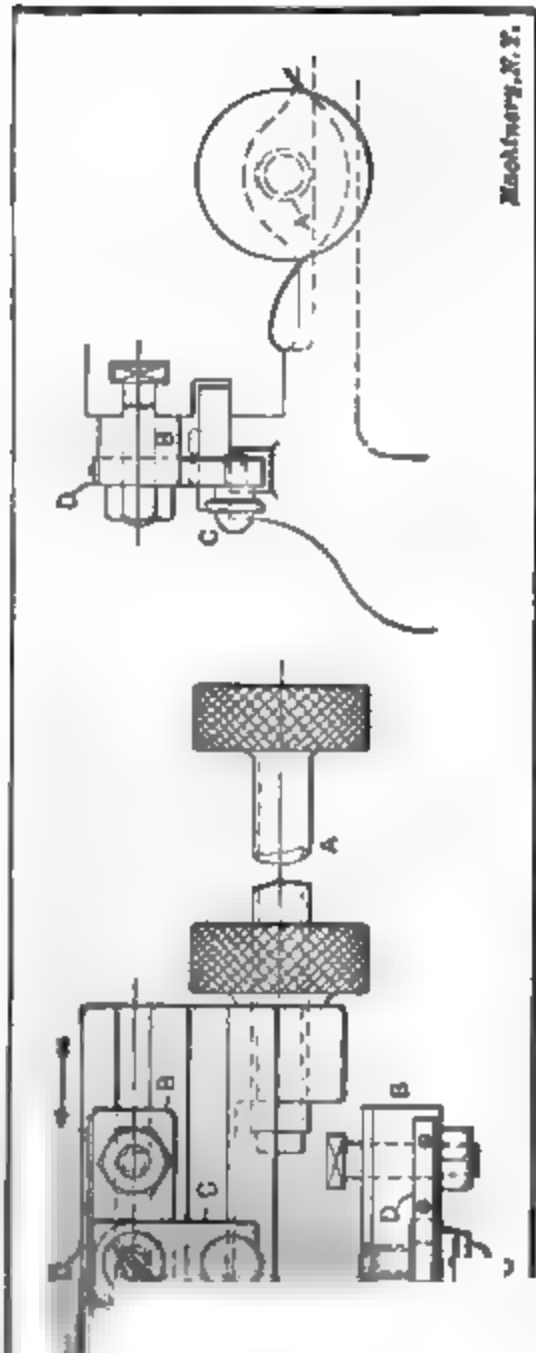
Double Stops used on Turret Lathe, making it possible to obtain Two Lengths without the Necessity of readjusting the Stop-screw
